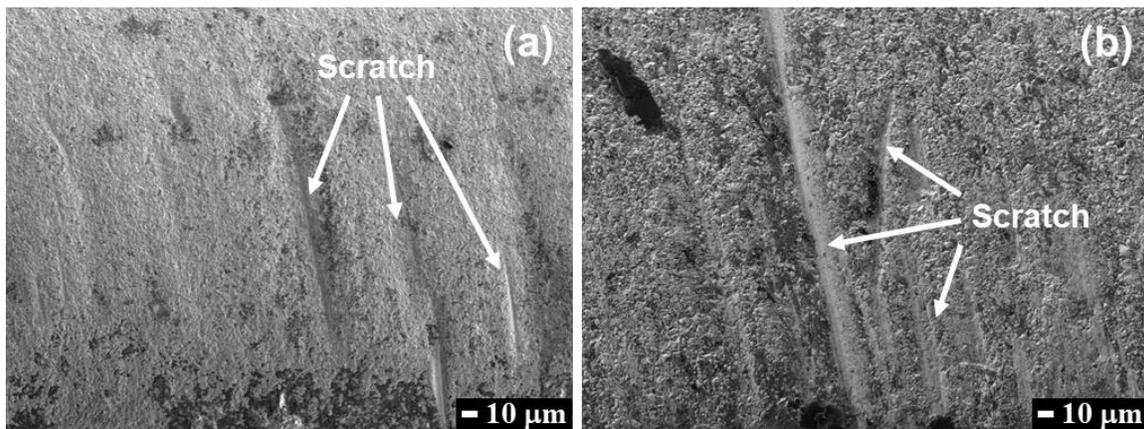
The shape of the abrasive wear of the tool: (a) the scratches during test number 6 and (b) the scratches during test number 7
